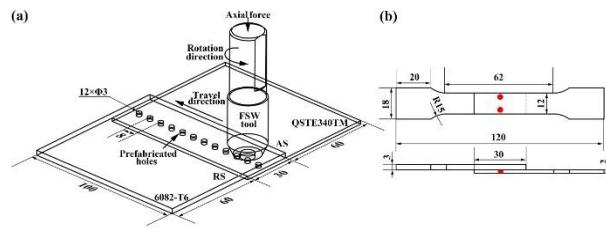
(a) Schematic illustration of FSLW process (Dimensions in mm); (b) Dimensions of the shear tensile specimen
